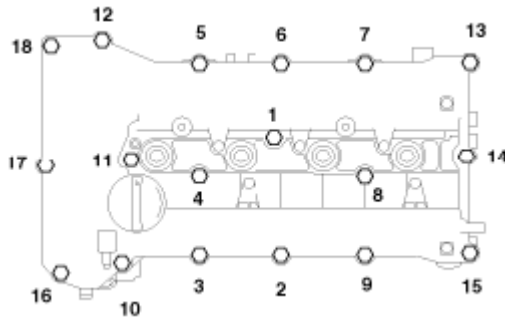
Identifying Cylinder Head Core Bolts Tighten Sequence
